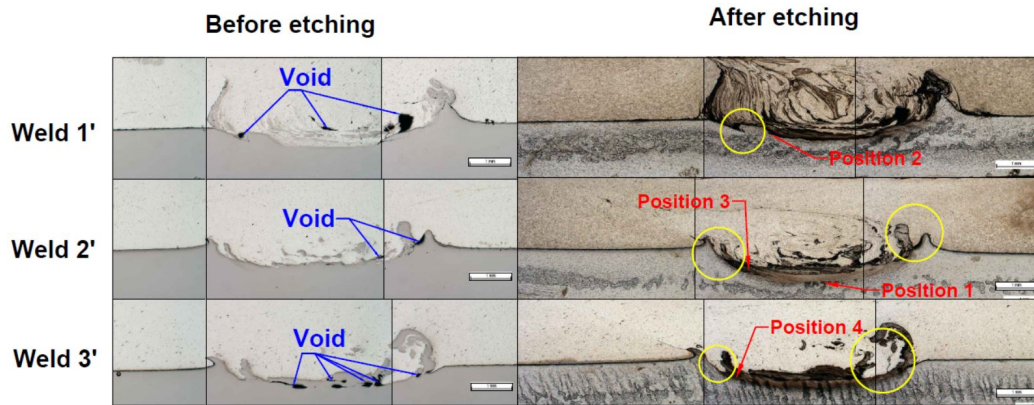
Optical macrographs of a weld 1' made using a travel speed of 100 mm/min, a weld 2' made using a travel speed of 200 mm/min, a weld 3' using a travel speed of 400 mm/min.
